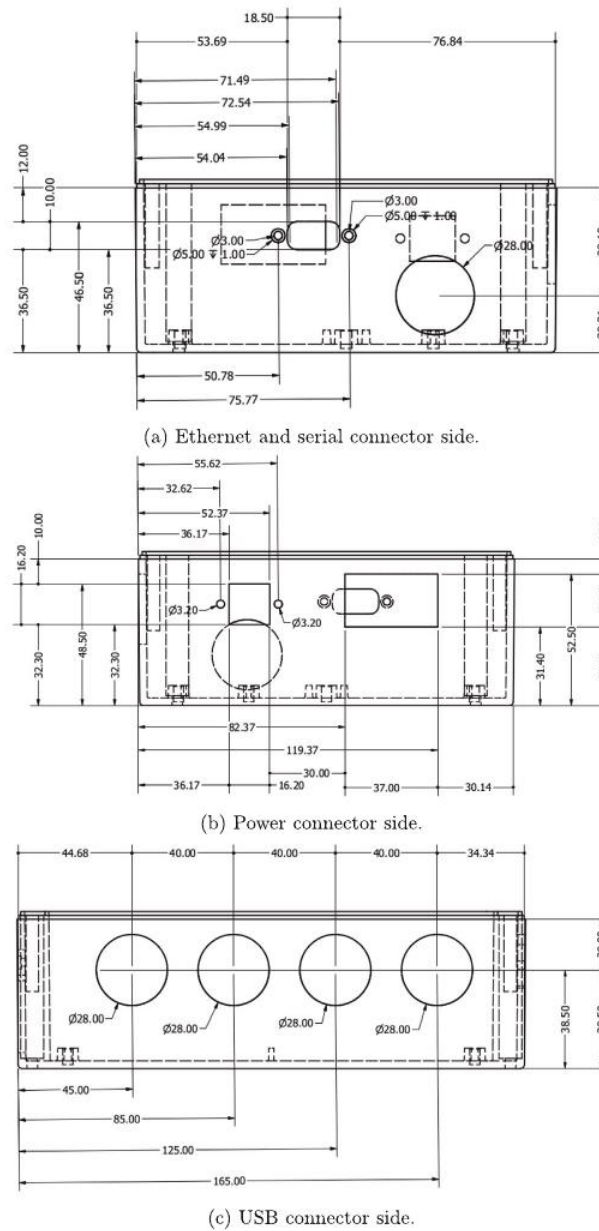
Drawings of the holes that need do be machined into the Bopla M 223 G casing.
